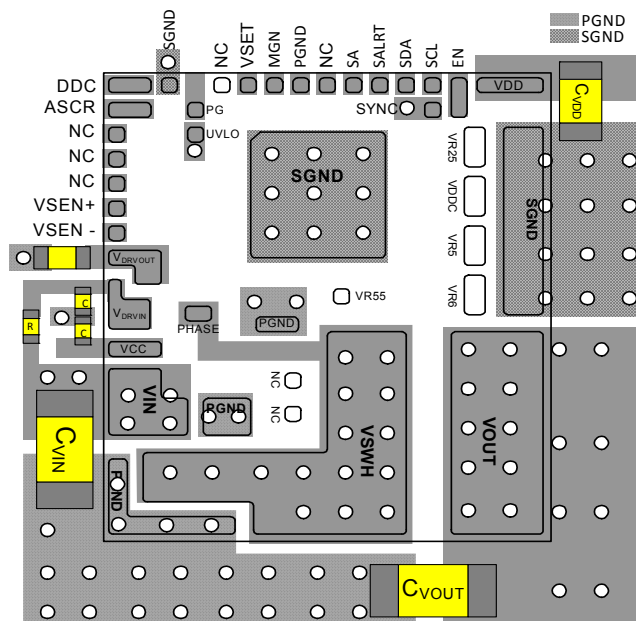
RECOMMENDED LAYOUT - TOP PCB LAYER
